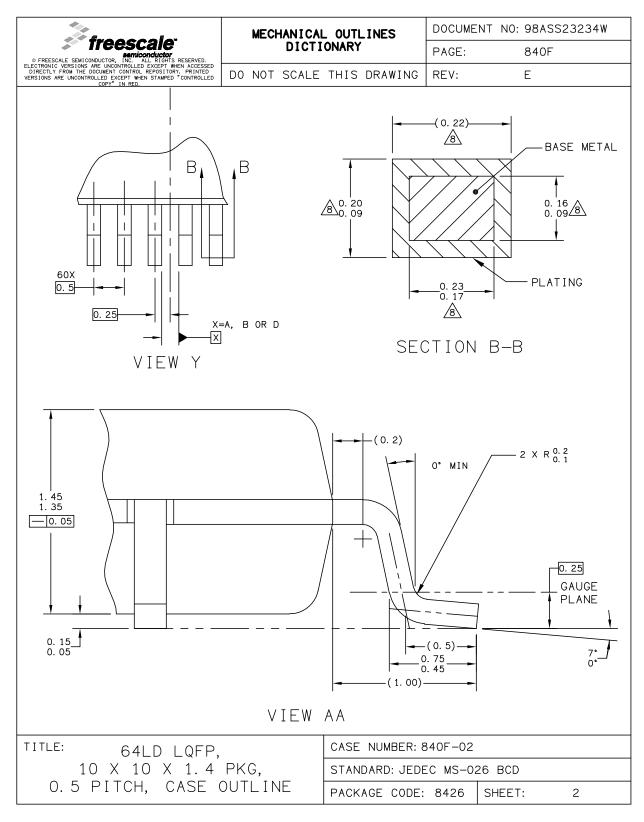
64 LQFP package mechanical drawing (2 of 3)
